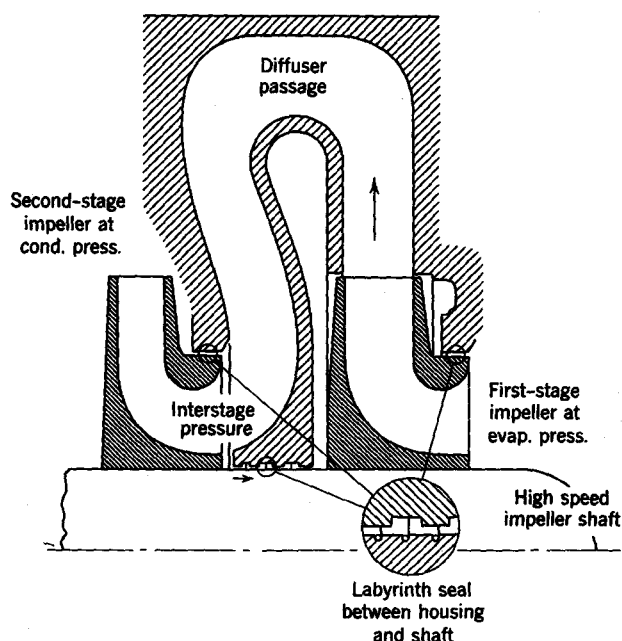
Labyrinth seal between impellers. (Courtesy York Corporation.)
